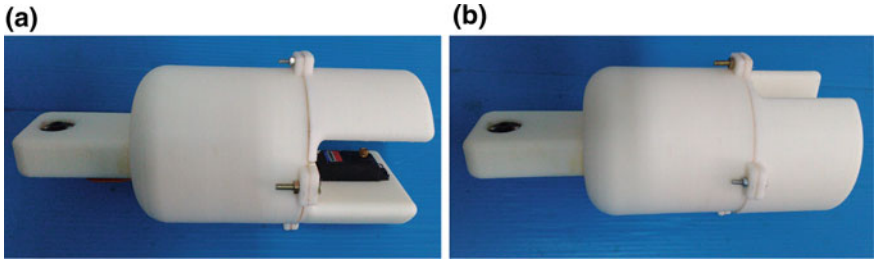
Assembly of 3D printed modules to obtain an intermediate link with twist angle a 0 and b $\pi/2$
